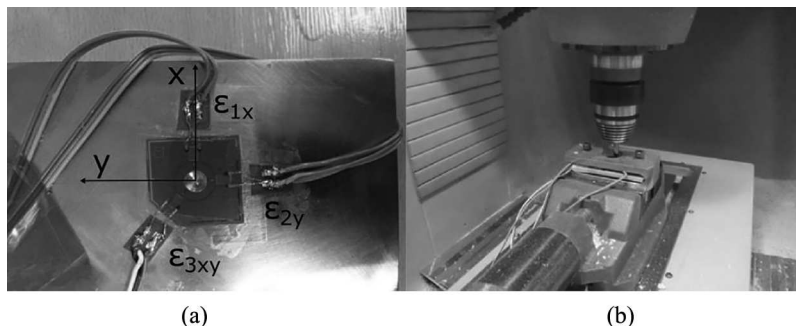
(a) 1-RY21-3/120 strain gage rosette set up on a ball-burnished specimen. (b) Fixation of specimen on Odisea CNC with controller Fagor 8055 for incremental hole drilling.
